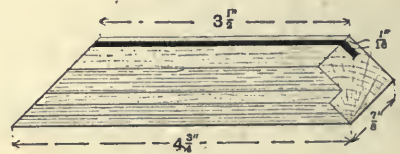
PIECE OF DARK-SLIDE FRAMING.
